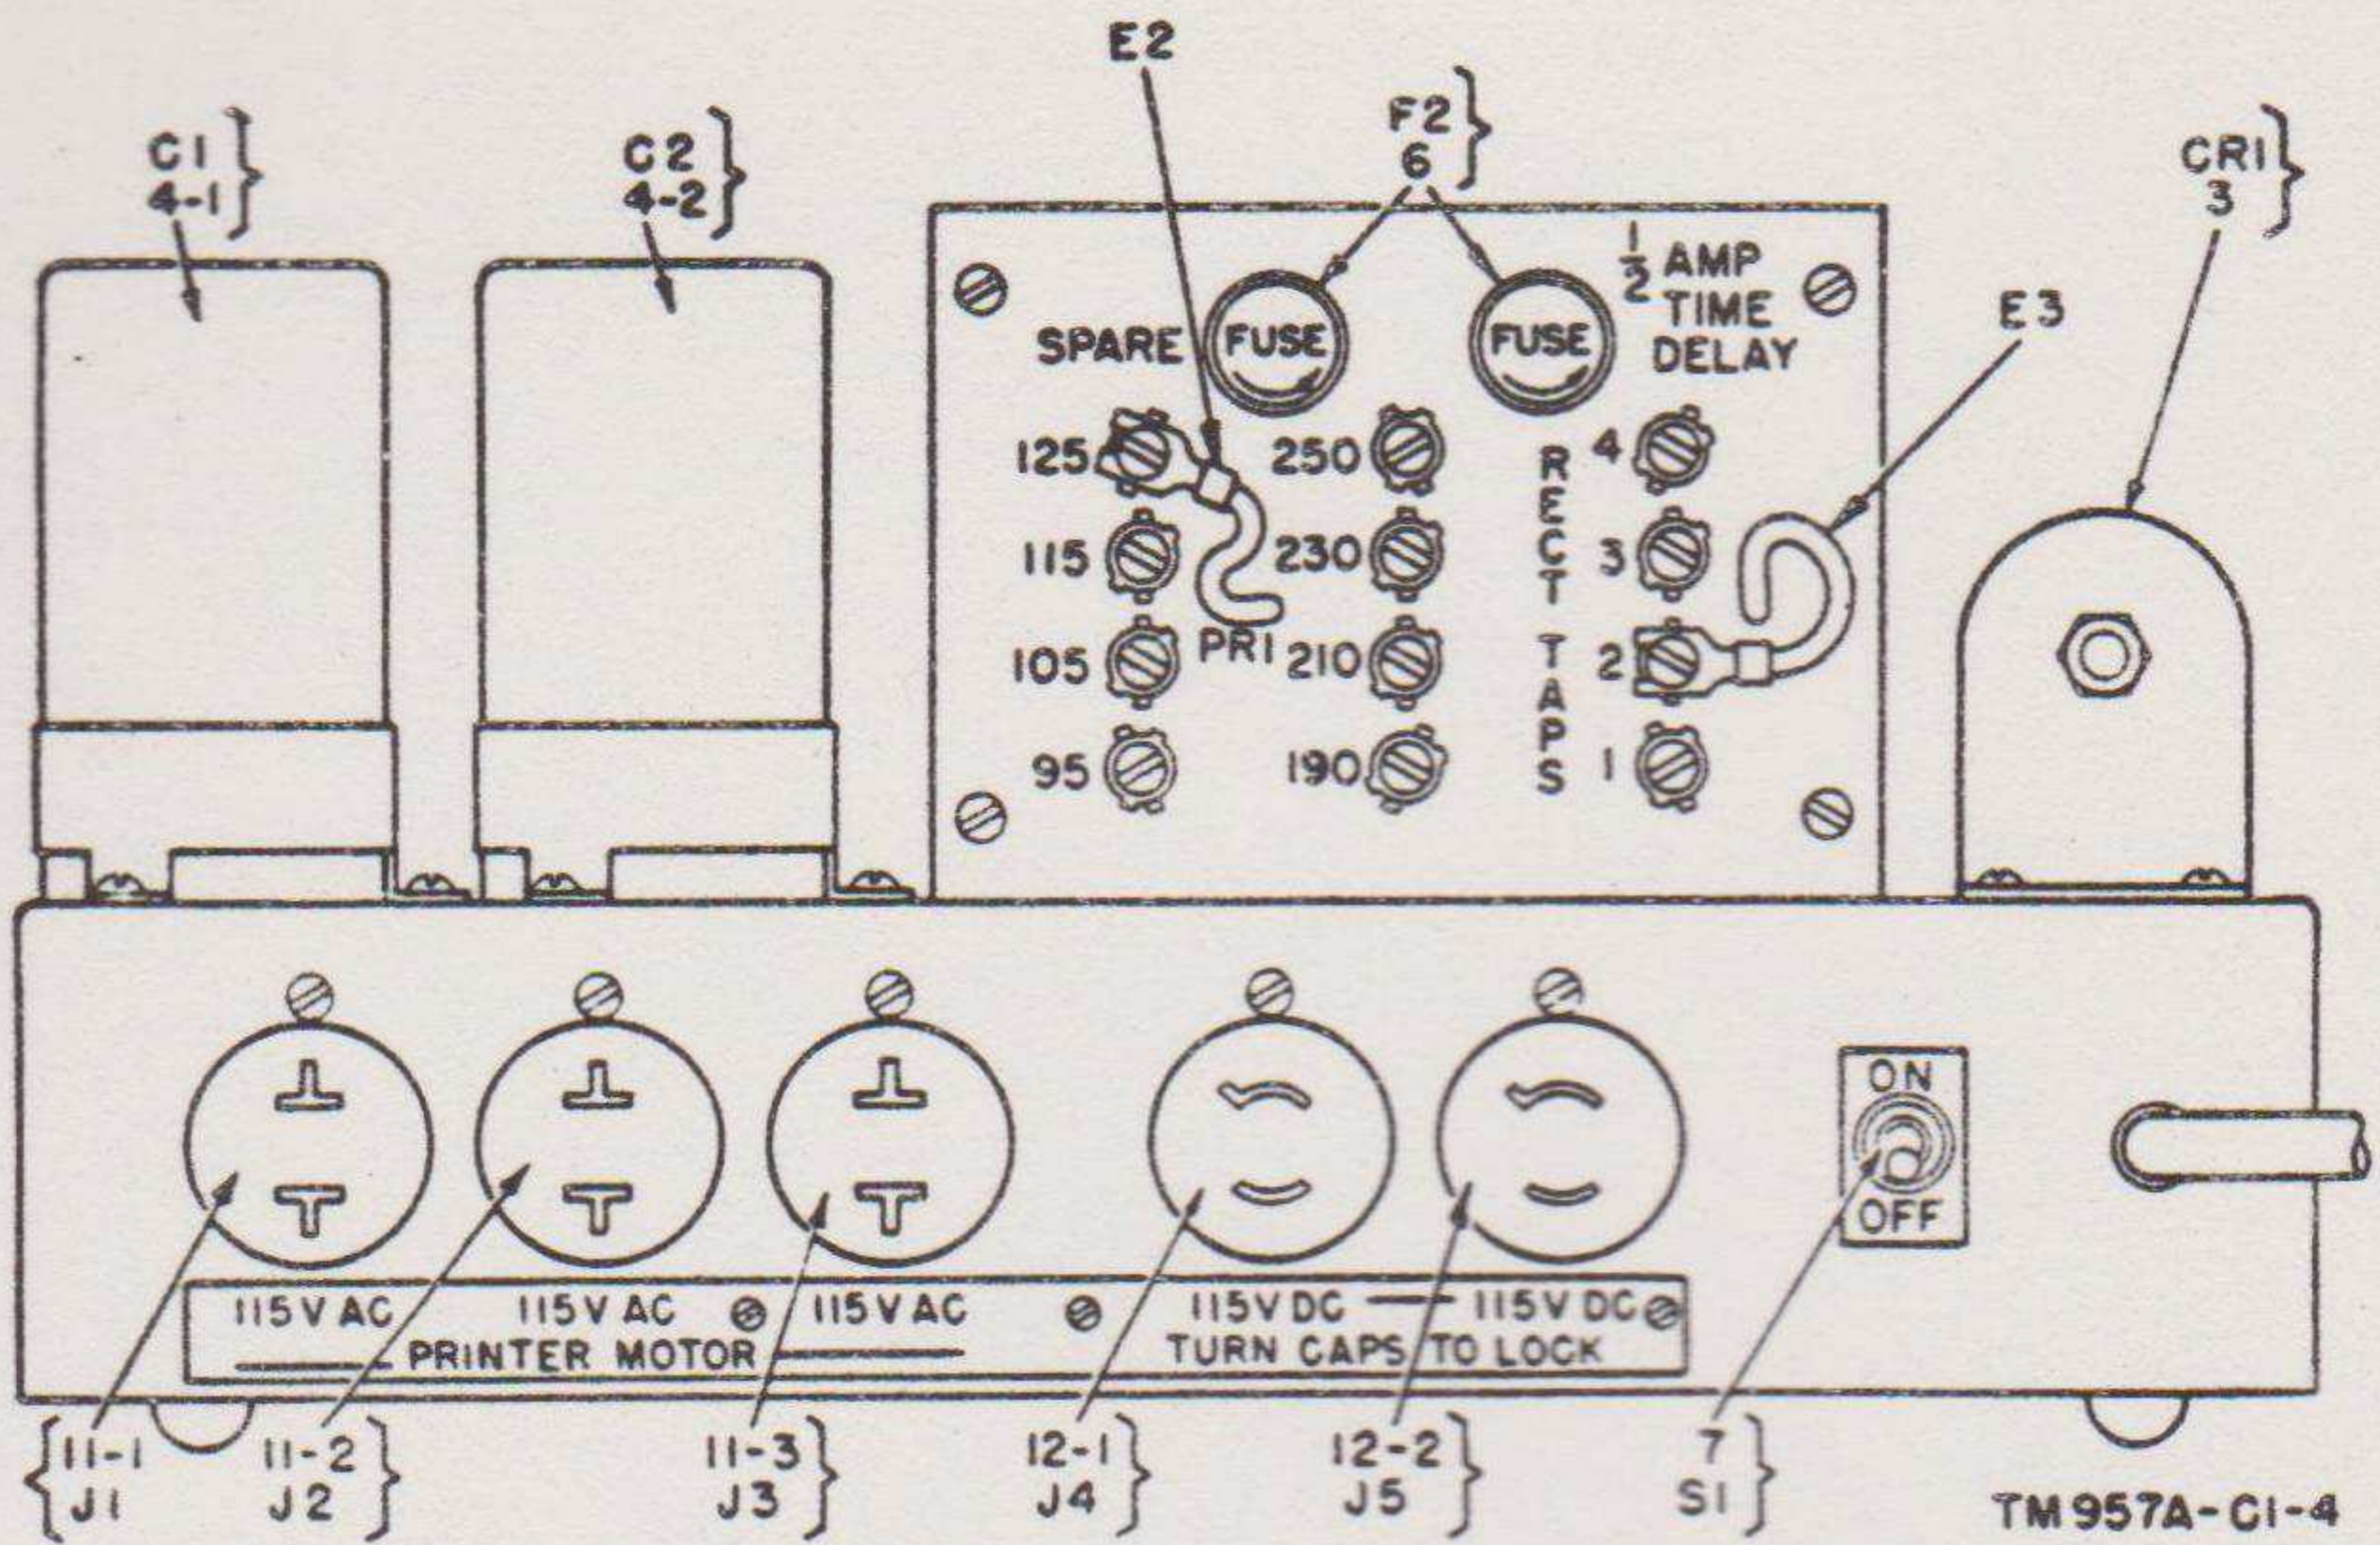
(Added). Rectifier RA-87-A, front view of chassis, parts location diagram.
